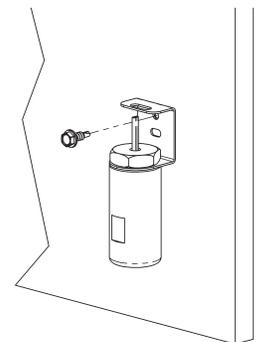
Hanging Bracket Wall Installation (Customer Provided Screws)
